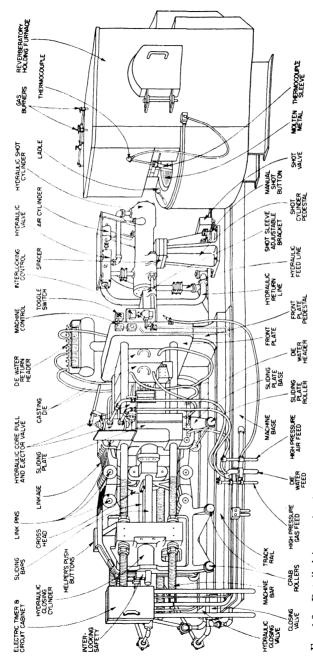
Detailed isometric view showing all major components of a modern cold-chamber die-casting machine. Although each machine may differ somewhat, depending upon the manufacturer, they are all quite similar in principle.
